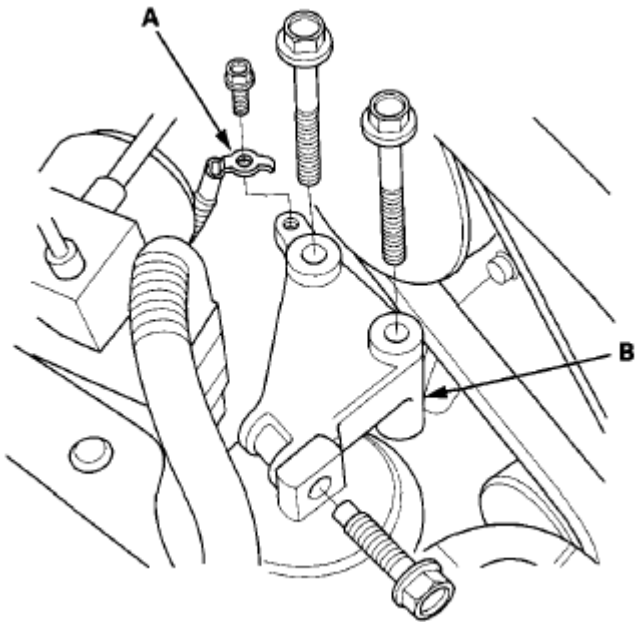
Removing Upper Half Of Side Engine Mount Bracket
